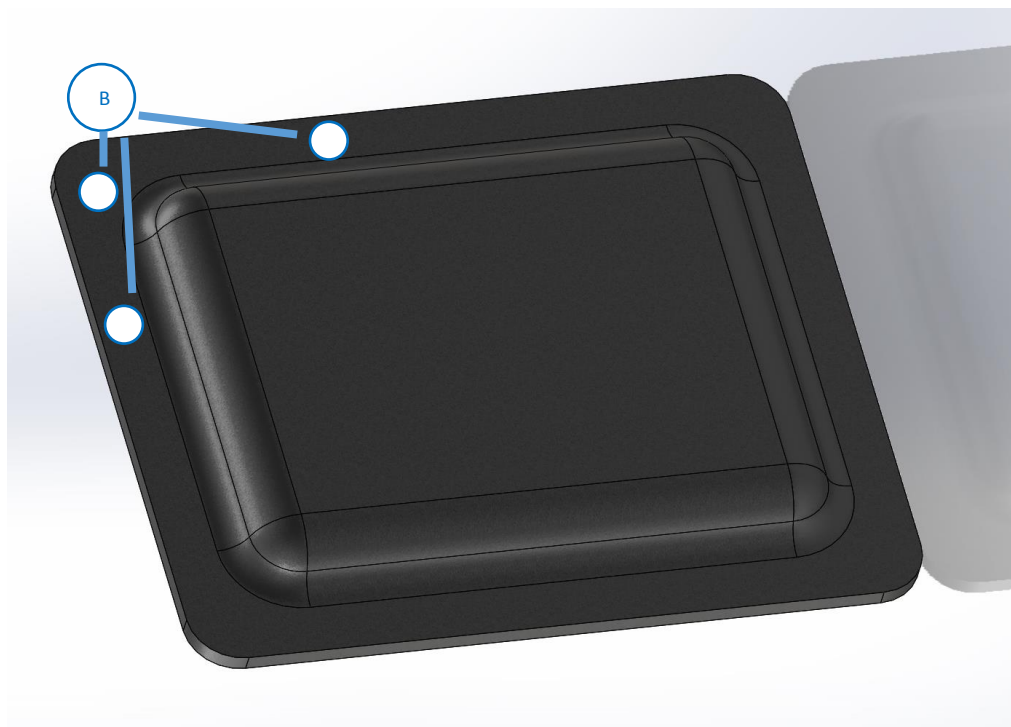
View of reference radome showing the outer lip where you may place your mounting screws for your enclosure.
